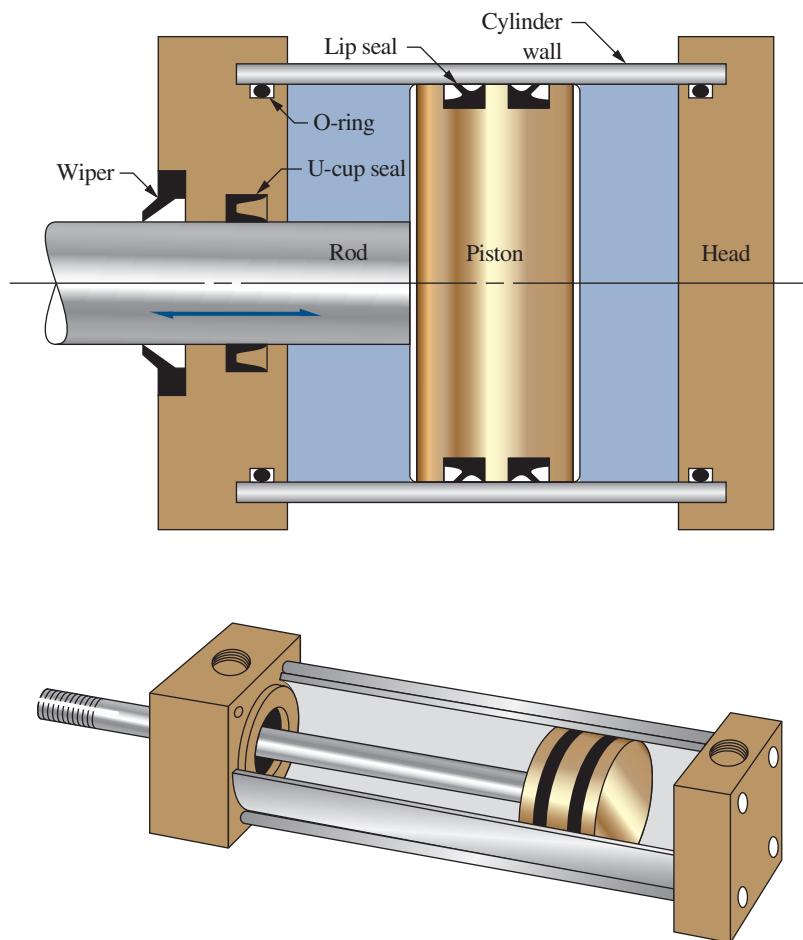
Lip seals, U-cup seal, wiper, and O-rings applied to a hydraulic actuator
